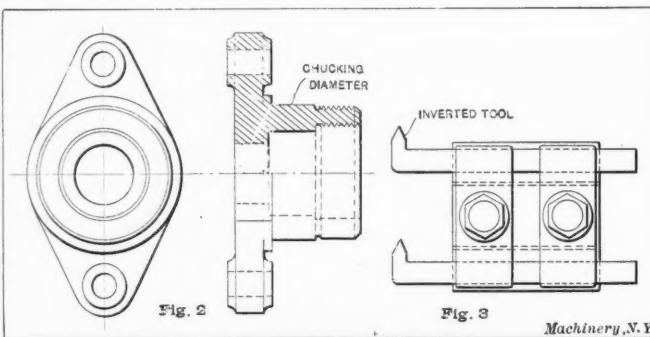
Piece machined in Turret, to be threaded in Engine Lathe.
